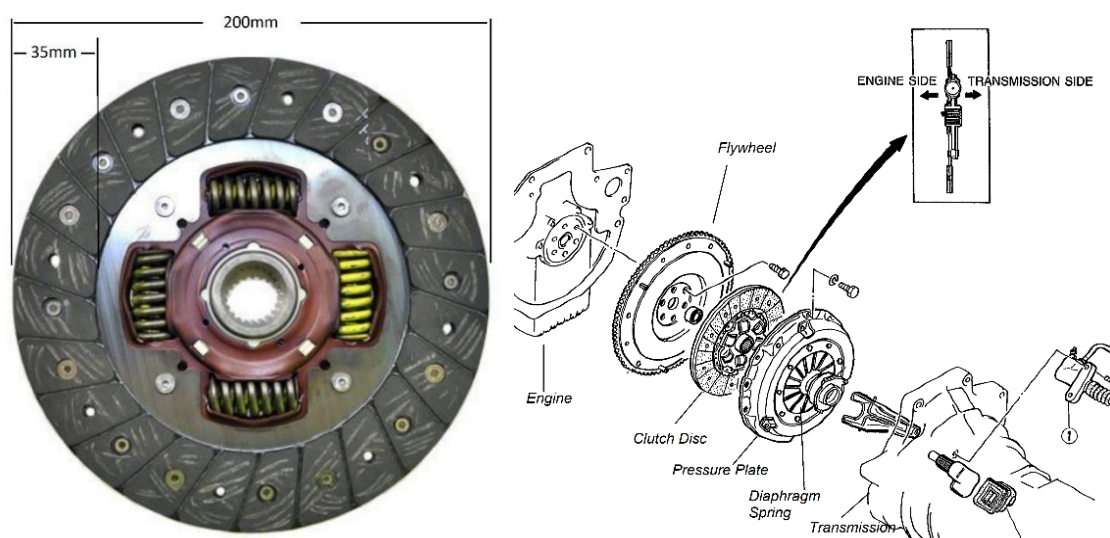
Clutch dimensions and assembly diagram (Mazda Motor Corporation 1989)
